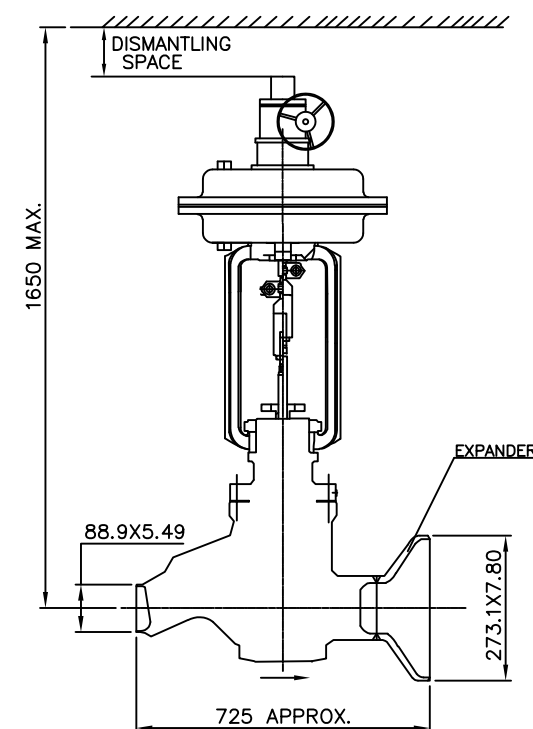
PROPOSED ARRANGEMENT OF SEAL STEAM SUPPLY VALVE (REFER SH.2, T.R. 1.3)
